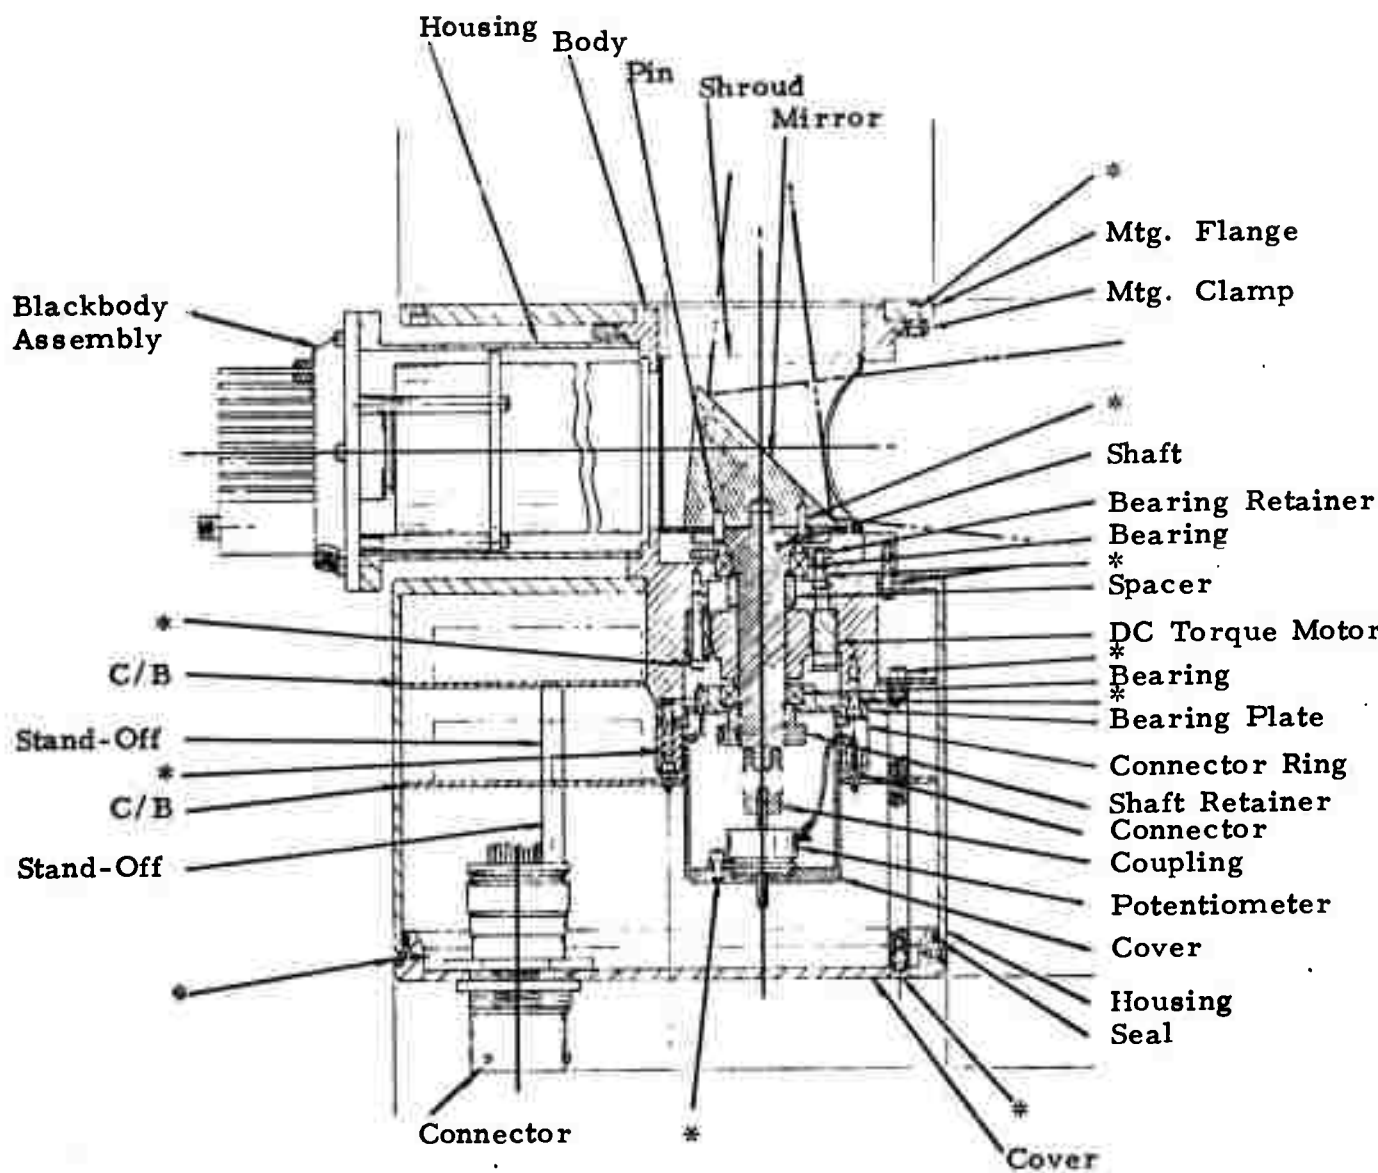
Scanner Assembly for Radiometer (Fig. 4)
